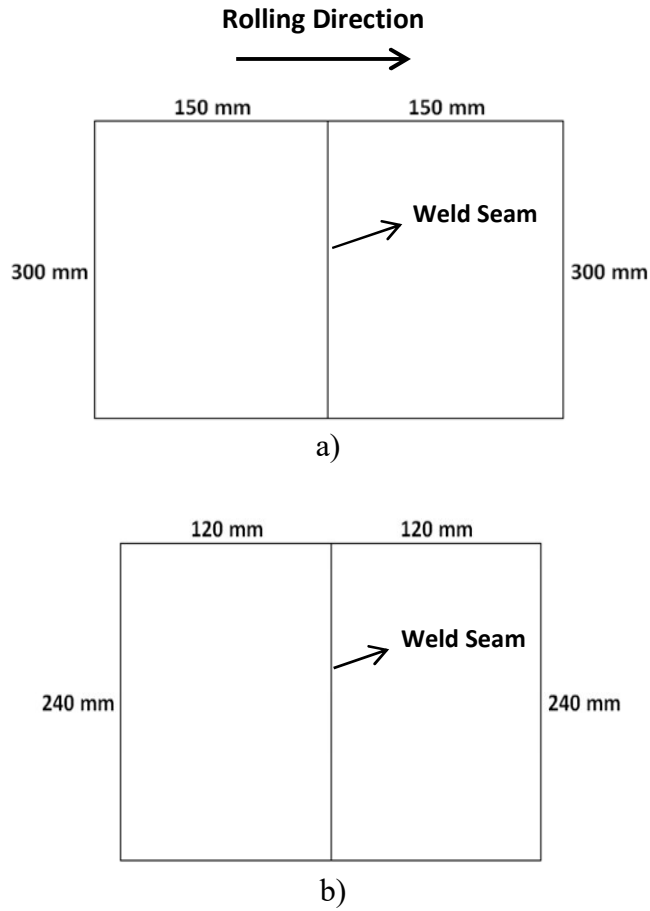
The dimensions of the the steel sheets in the laser welding butt configuration:
